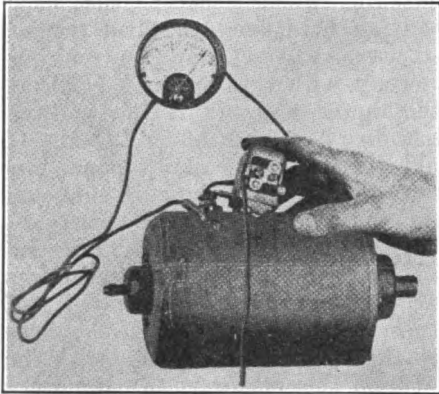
THE TEST IS CONTINUED BY HOLDING THE CUT-OUT ON THE GENERATOR WHILE THE VOLTMETER IS STILL ATTACHED
